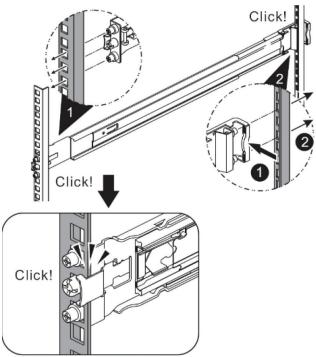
MOUNTING BOXILLA STEP 3
